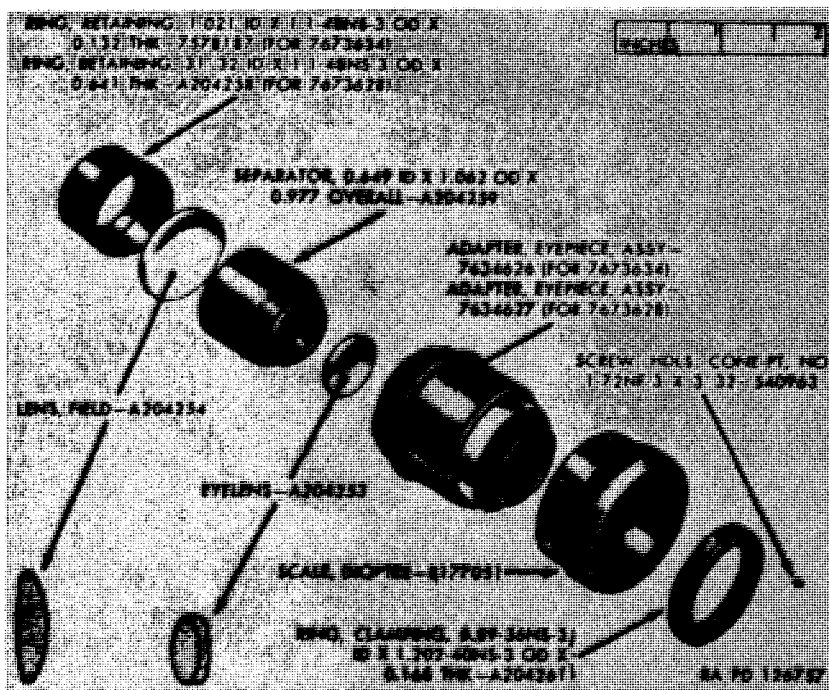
Eyepiece assemblies 7673634 (left, M16 only) and 7673628 - exploded view.
